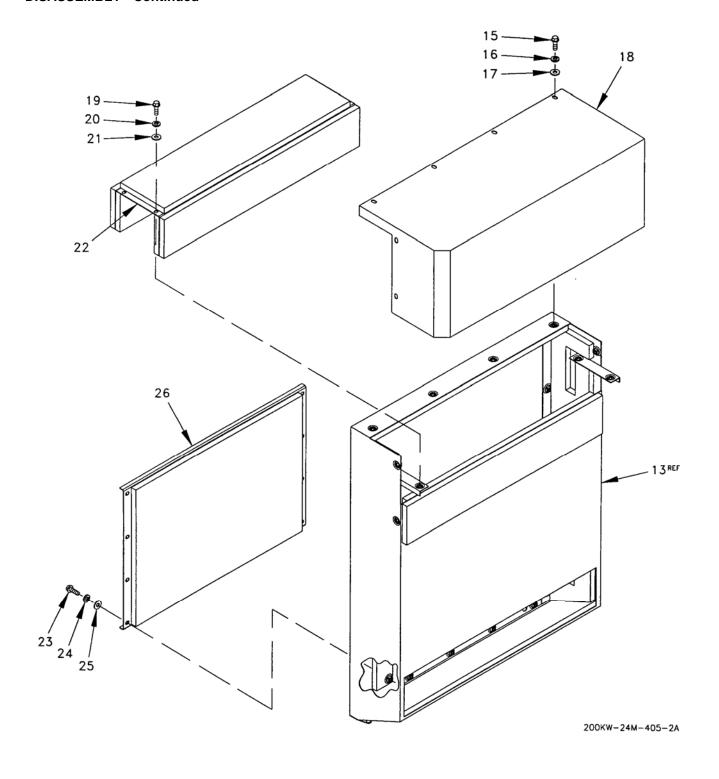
Left Rear Door Assembly (Sheet 2 of 2).
